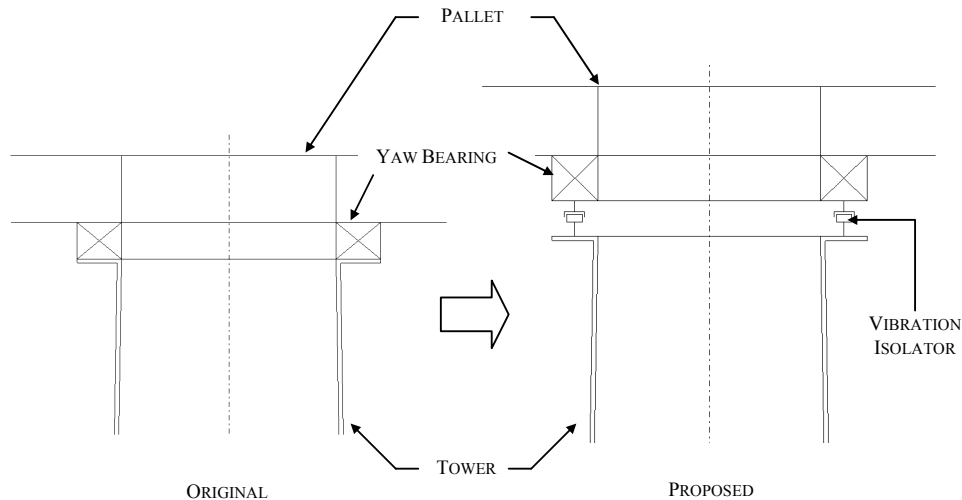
Proposed Solution 2 – Cross-Sectional View of Tower / Pallet Joint
